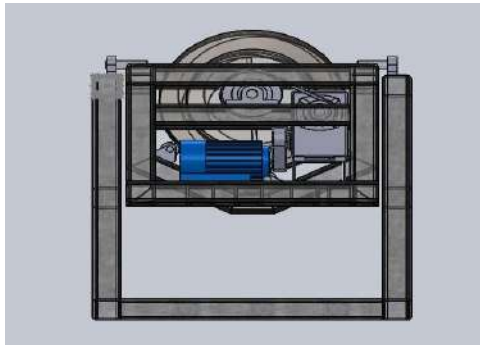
Position of the Drive Motor on the Mixer Machine
